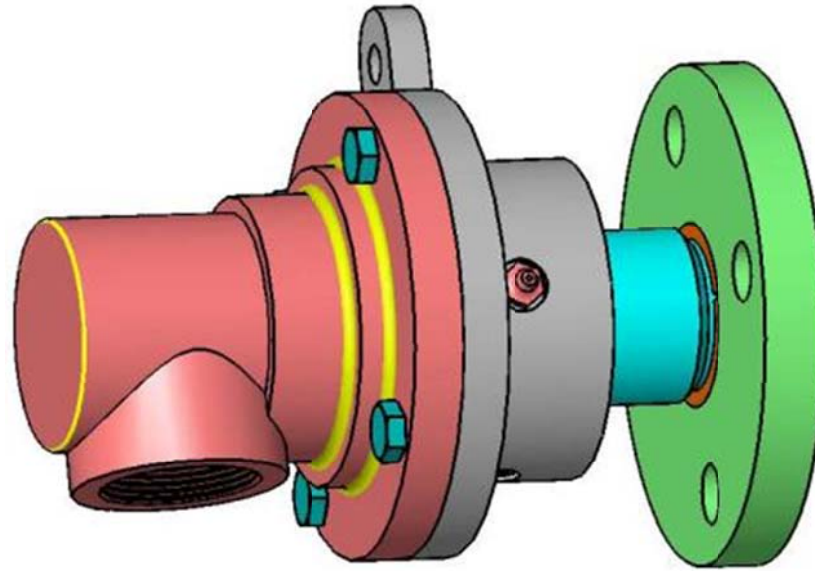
Assembly drawing for Single flow type HK rotary joint with quick release flange
